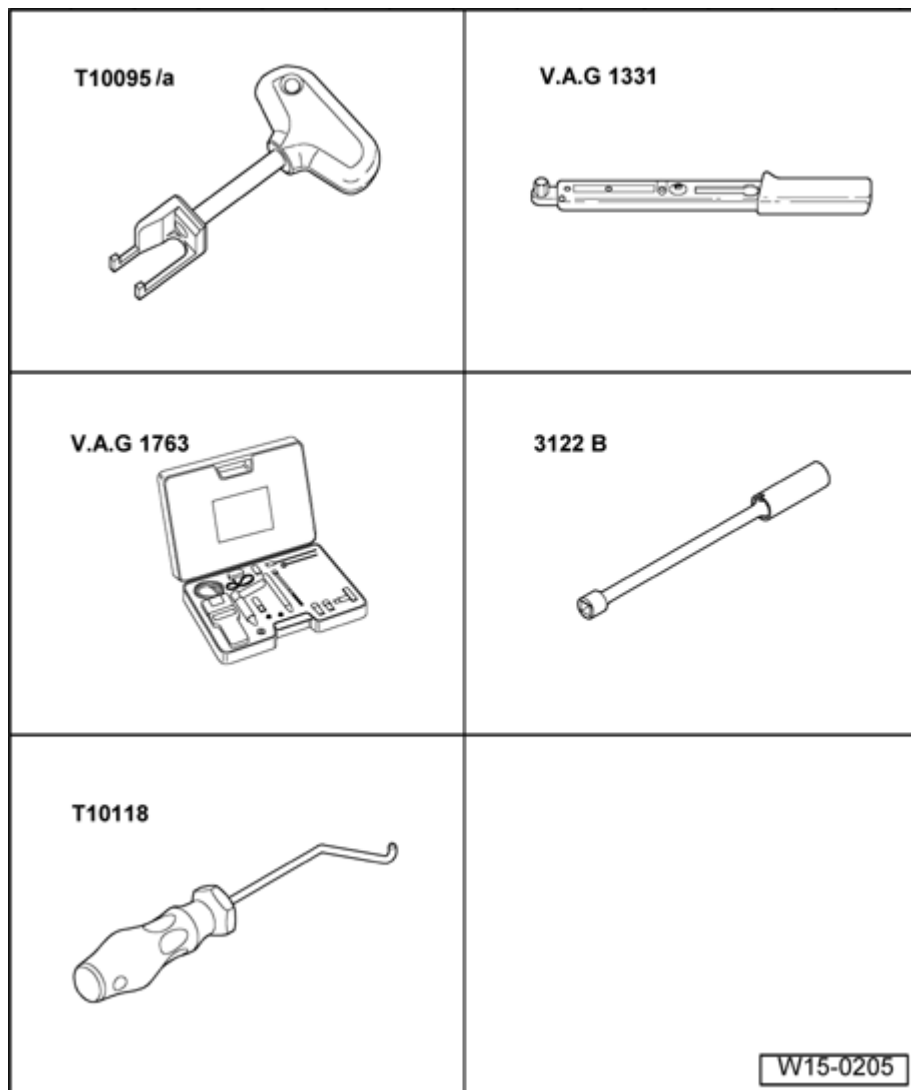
Identifying Special Tools - Compression Pressures, Checking
